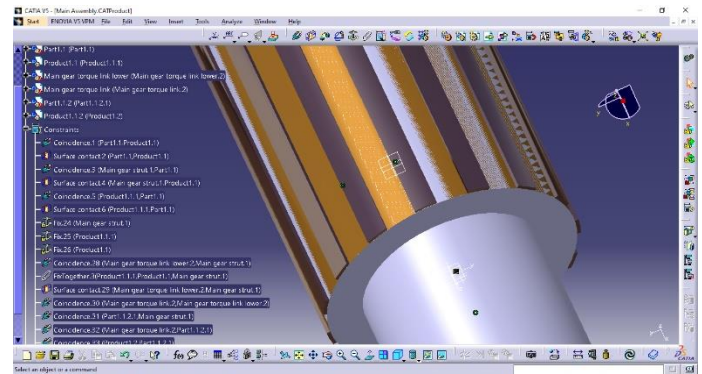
Assembly of DBD Plasma Actuator on landing gear upper strut (Close up view)
